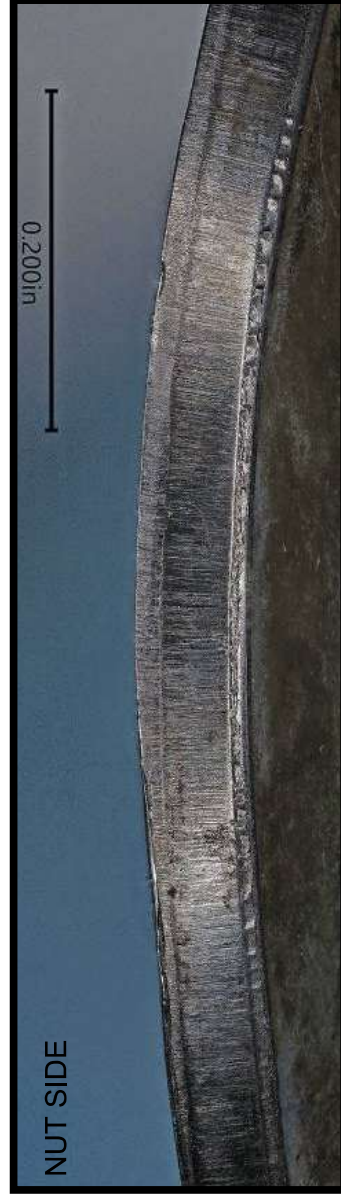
Detailed view of Tee Bolt Washer-Edge.
